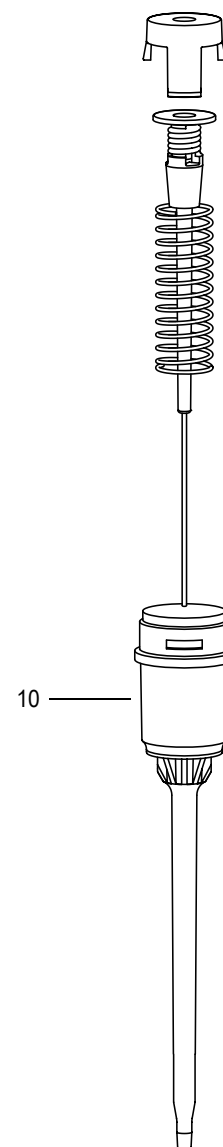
Disassembly, Assembly and Piston Exchange for All Pipettor Models
